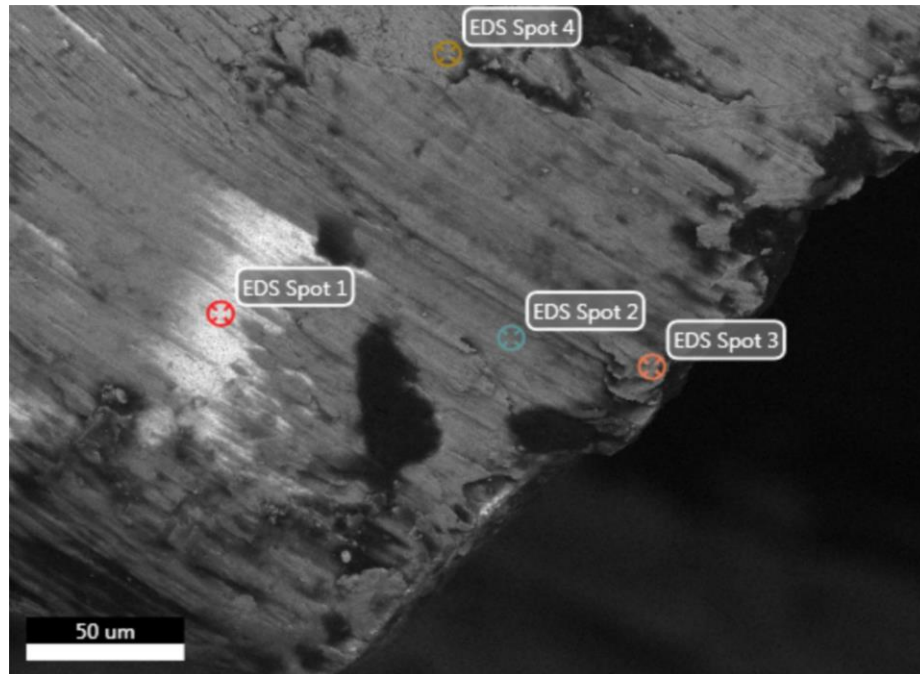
EDS spot analysis of the carbide drill bit cutting edge after drilling 60 holes in AM titanium.
